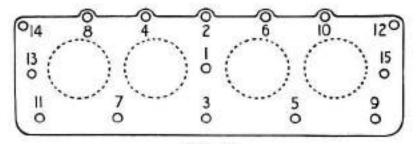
CYLINDER HEAD TIGHTENING SEQUENCE
